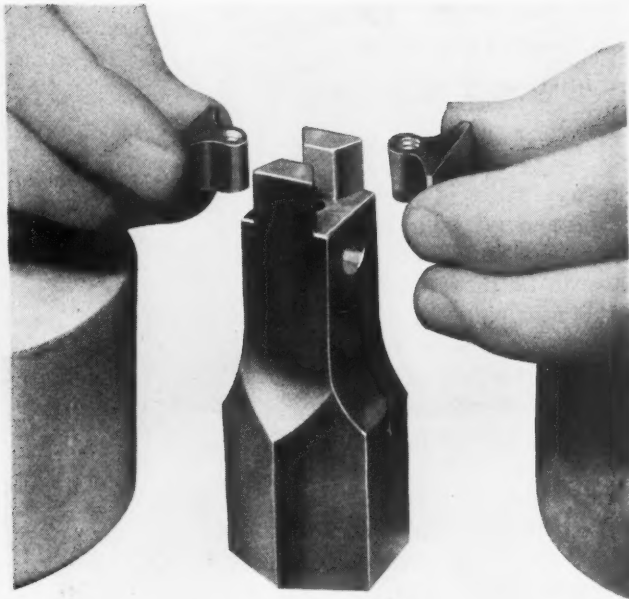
Double-sided Fixture that Provides for Alternate Loading from Either Side
